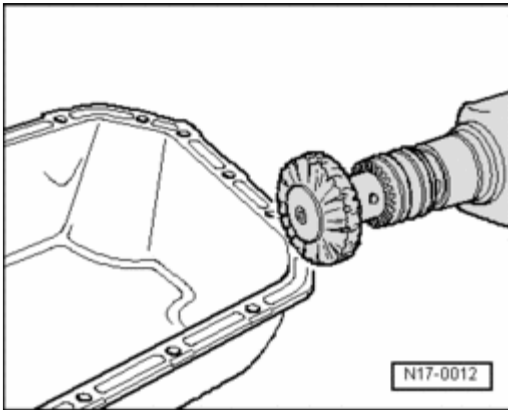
Removing Sealant Residue From Oil Pan With A Rotating Brush
